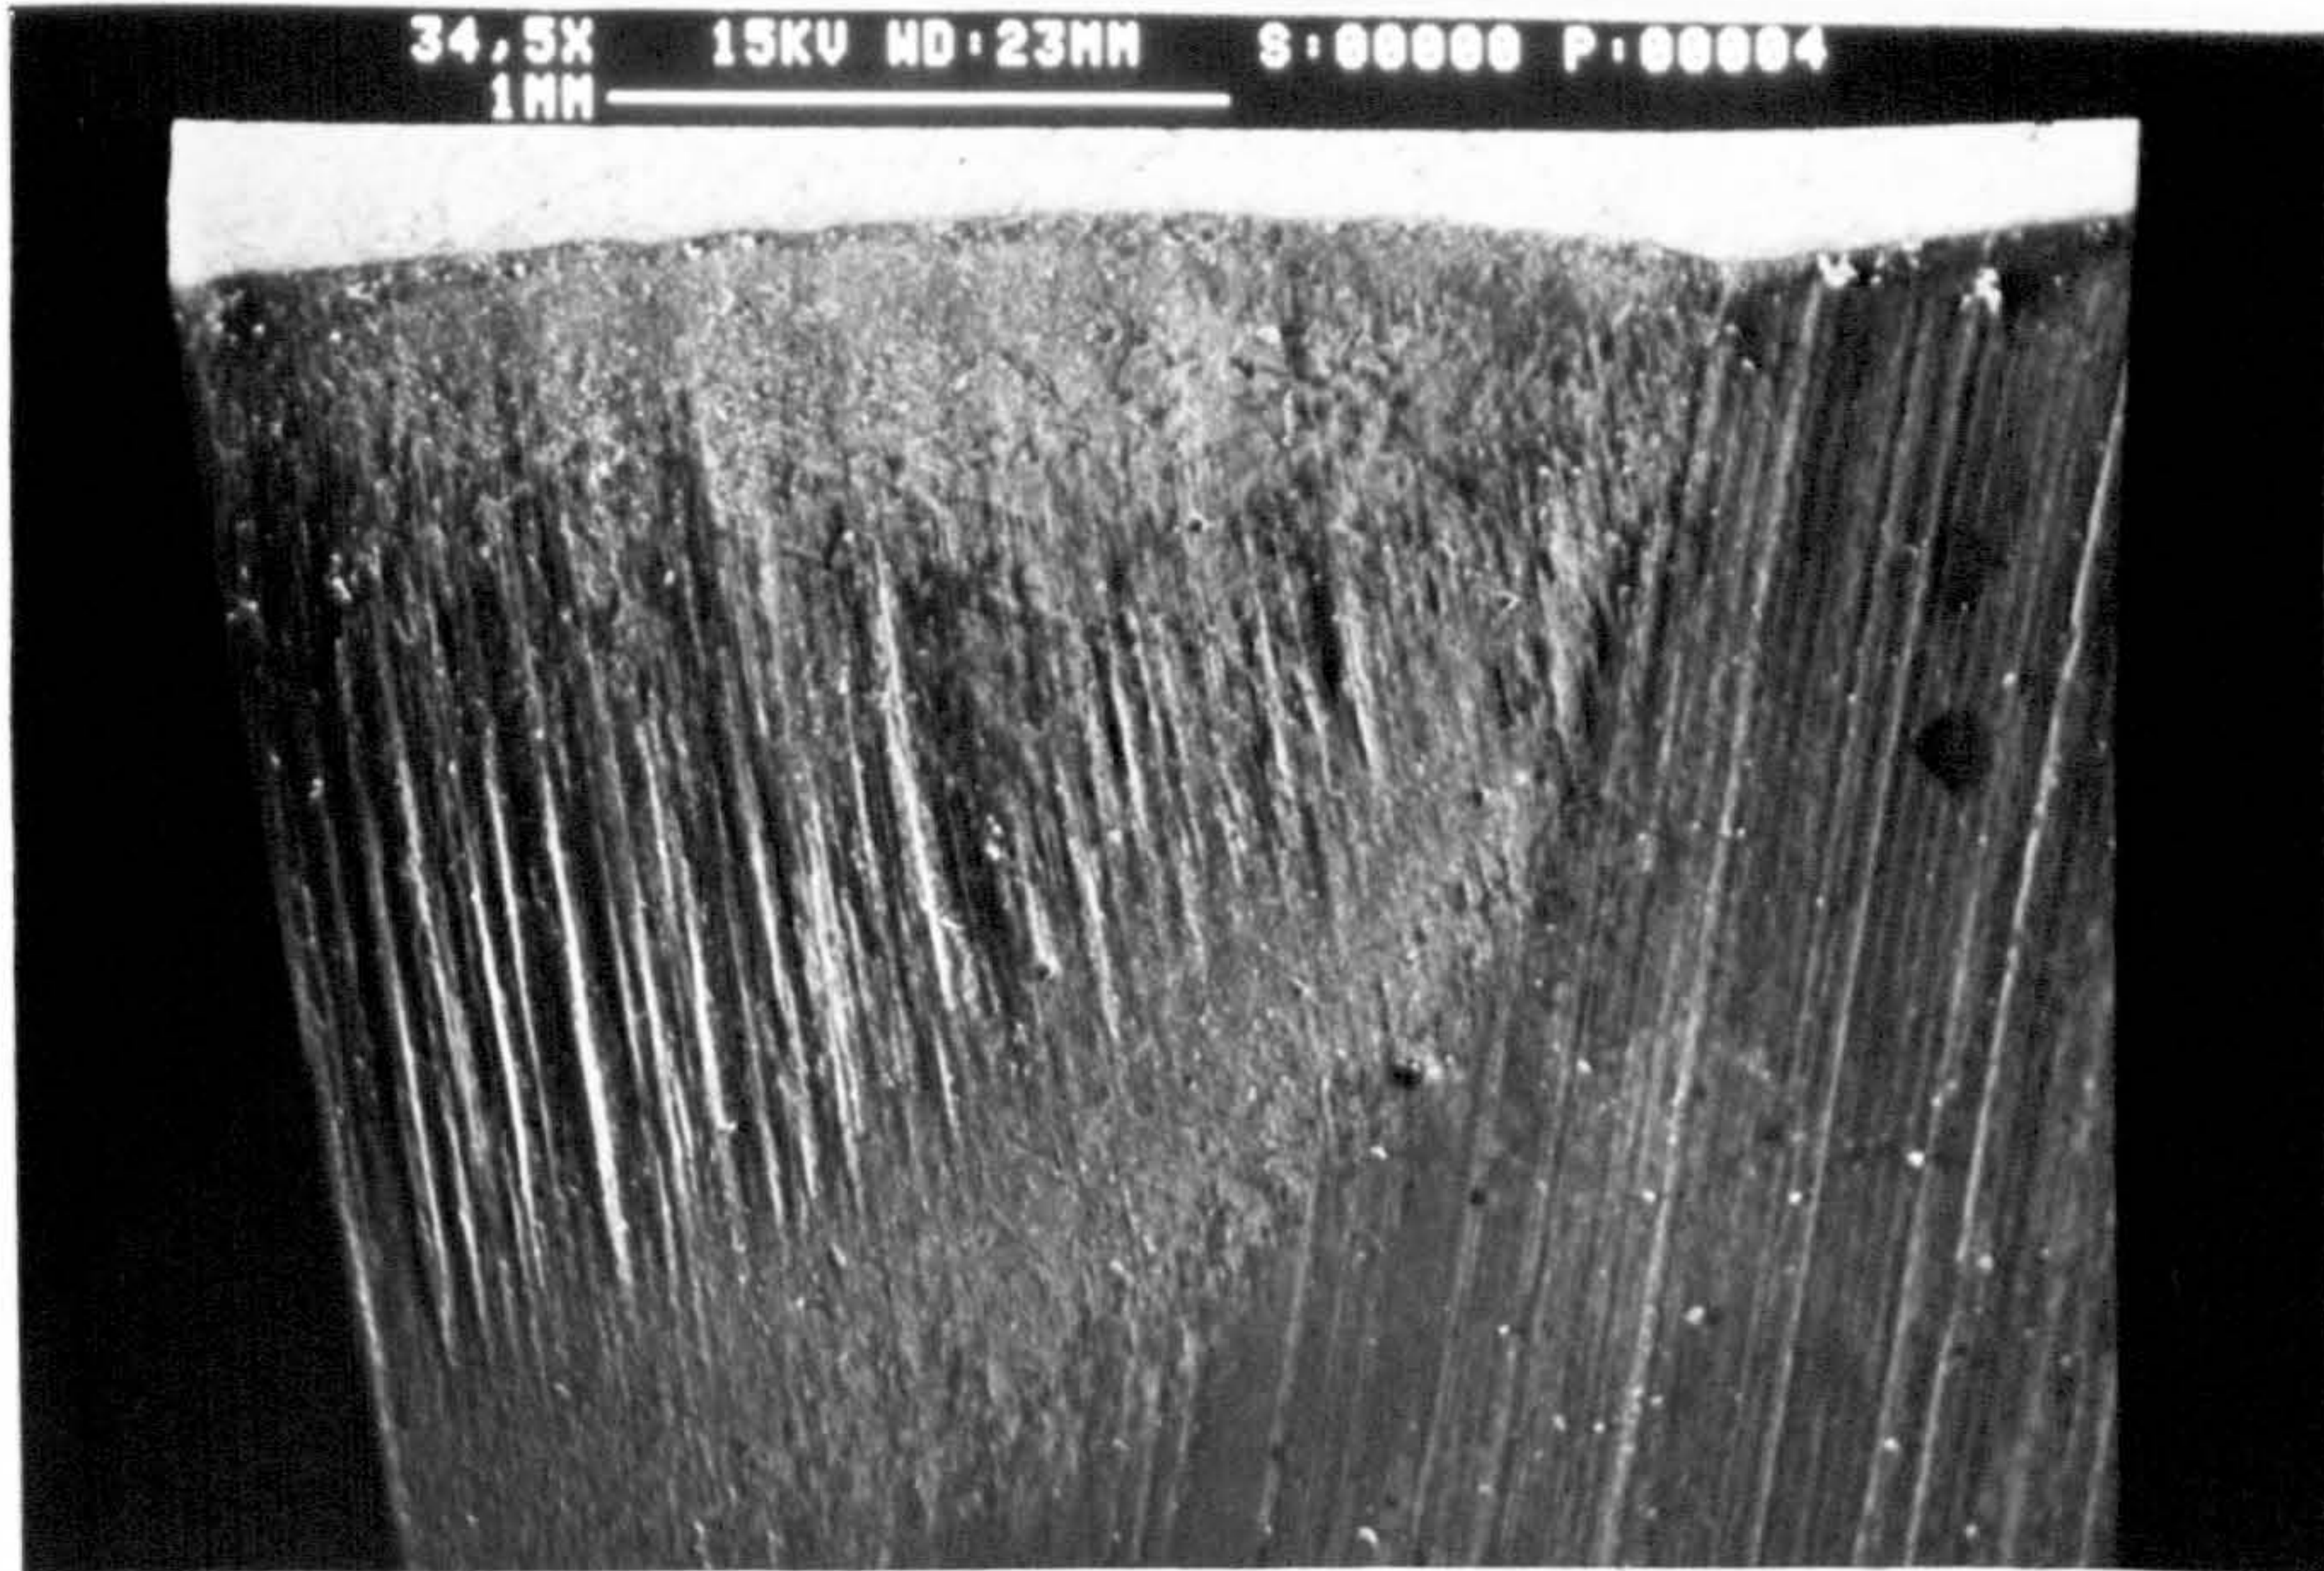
Flank wear land of a HSS tool after cutting at a rake angle of  $-20^\circ$  showing smooth surface near the cutting edge
